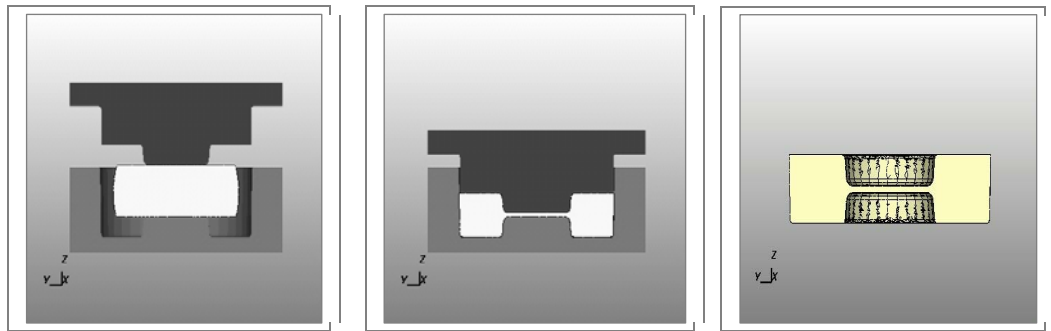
Plastic flow in impression of blocking die and correct shape of forging blank
